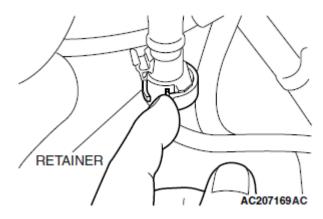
Removing Fuel Main Pipe Courtesy of MITSUBISHI MOTOR SALES OF AMERICA.
